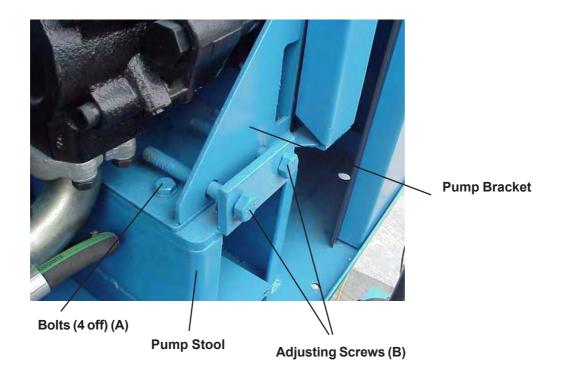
c Hydraulic Pump Drive Belt Tension Mechanism
